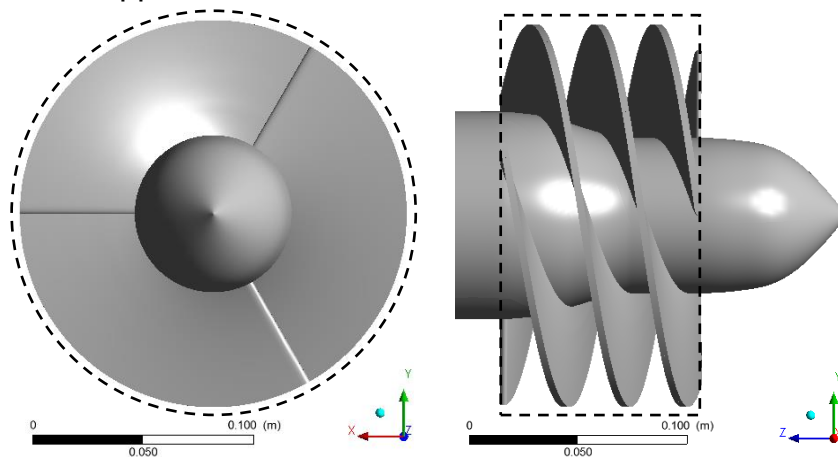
PWA Inducer impeller geometry and the impeller fluid domain (dashed lines)
